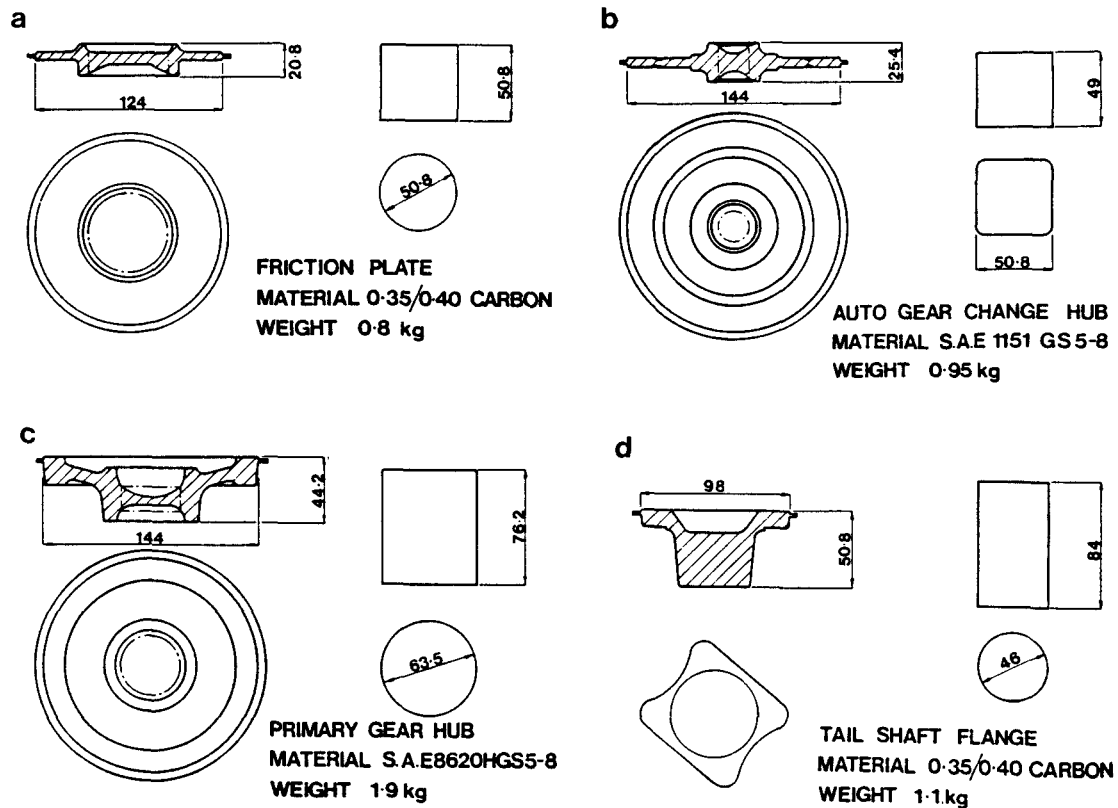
(a,b,c,d) Automotive parts warm rotary forged on Massey Rotaform. All dimensions in millimeters [14].
